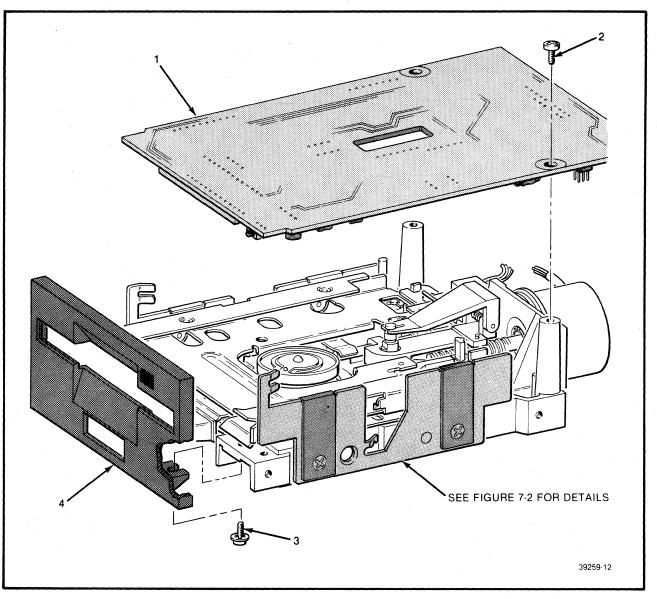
DRIVE PCB AND FACE PLATE ASSEMBLY
